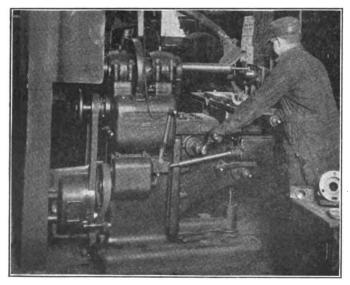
A Heald Internal Grinder May Be Used for Finishing Small External Surfaces—the Job Shown is a Link Trunion
